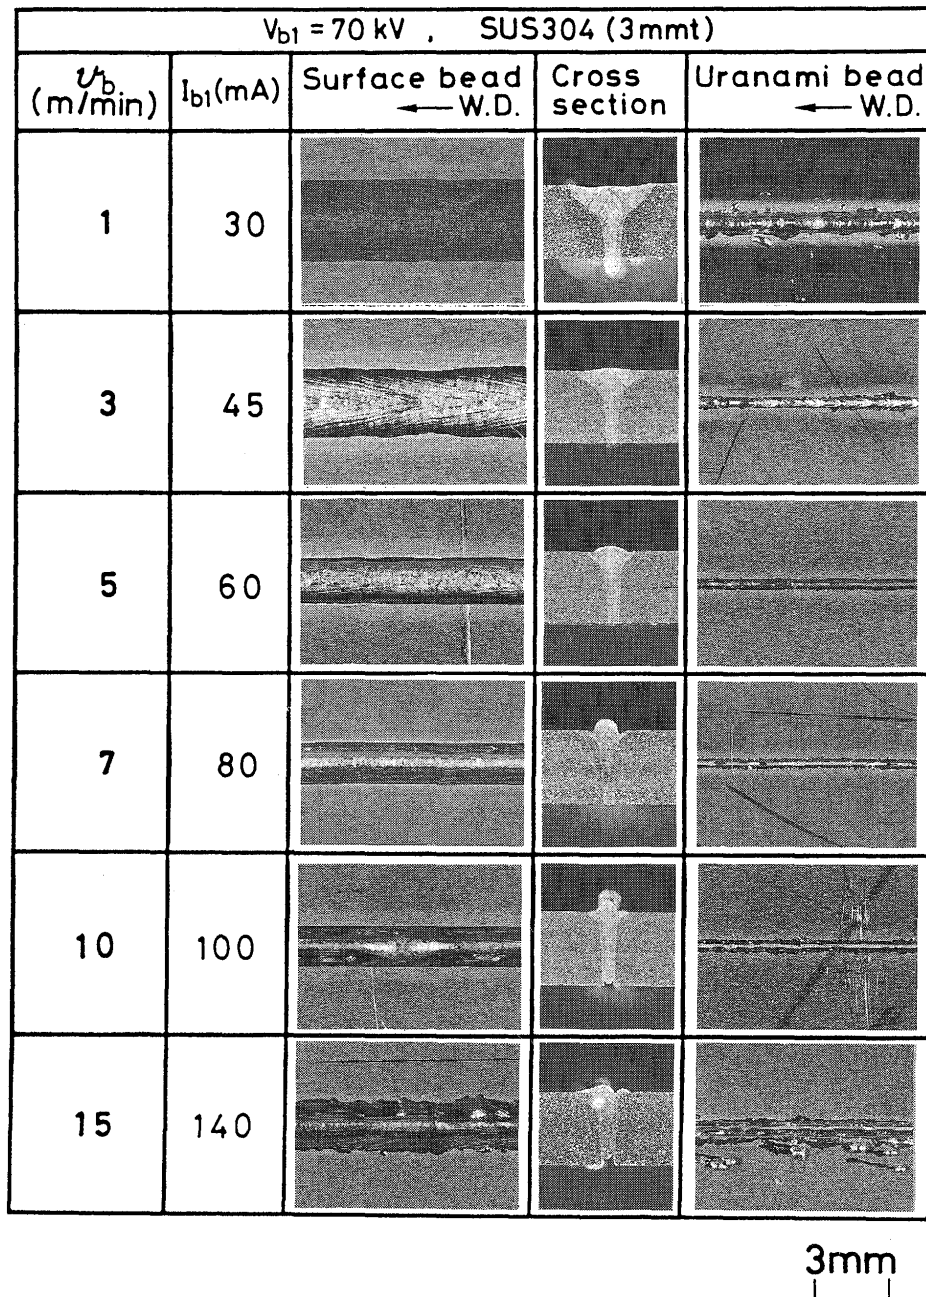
Bead appearance and cross section at various welding speed.
